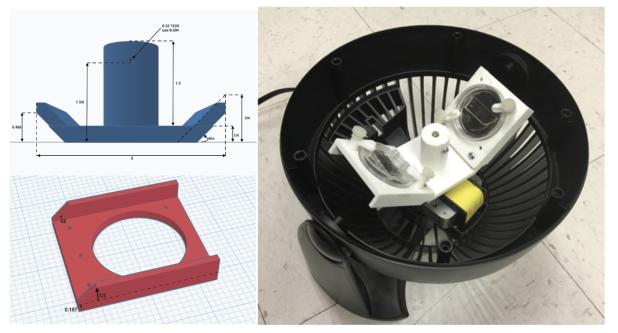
Inexpensive fabrication of stage insert and cell loader with 3D printing.
